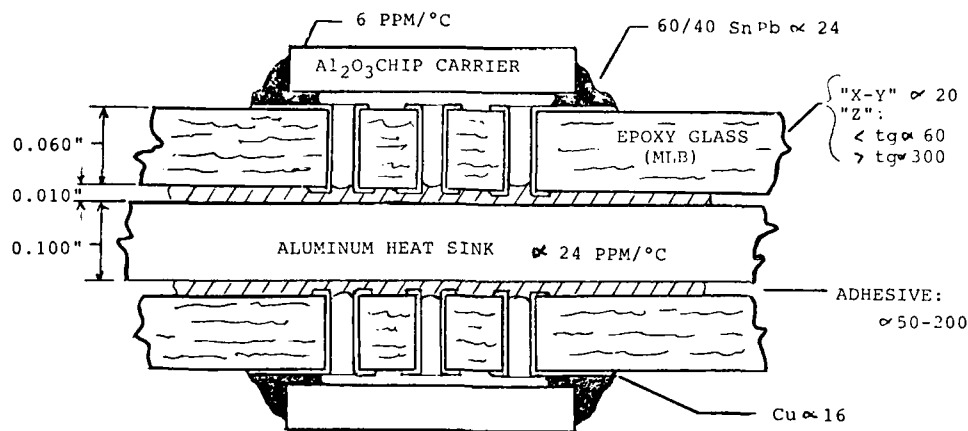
TYPICAL LCC/MLB ASSEMBLY
